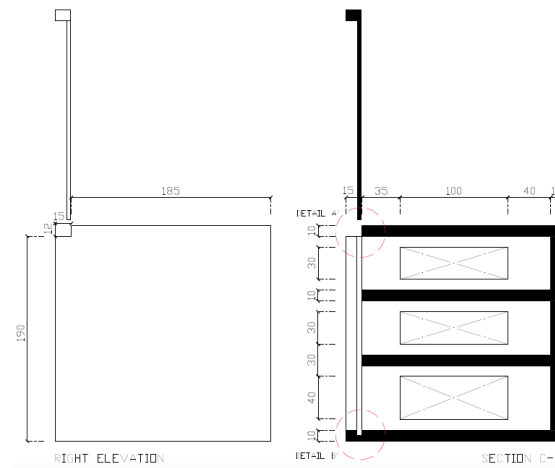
Right Elevation and Section C-C view of ID-QUBE
